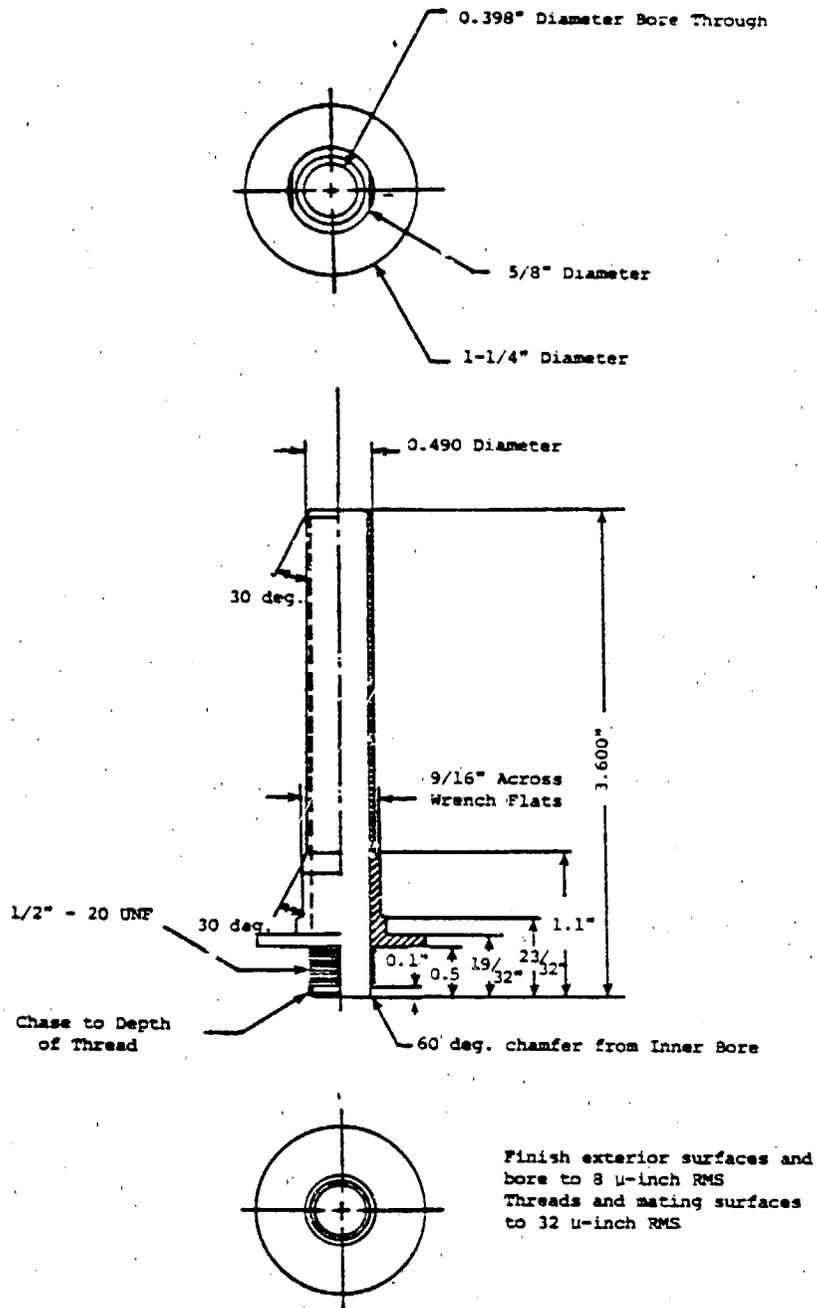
Design sketch, reverse exit tube for Cyclone 1.
